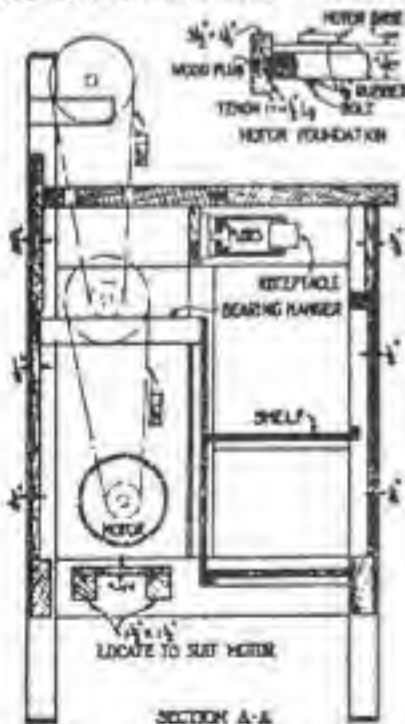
A sectional view of the bench lathe table through the locker and motor compartments.
